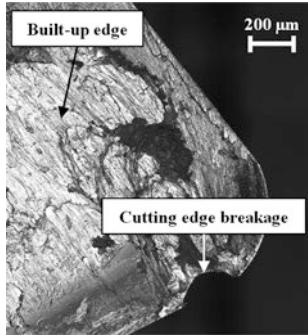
Image of cutting edge breakage at the position of TC1 and the built-up edge on the rake face
